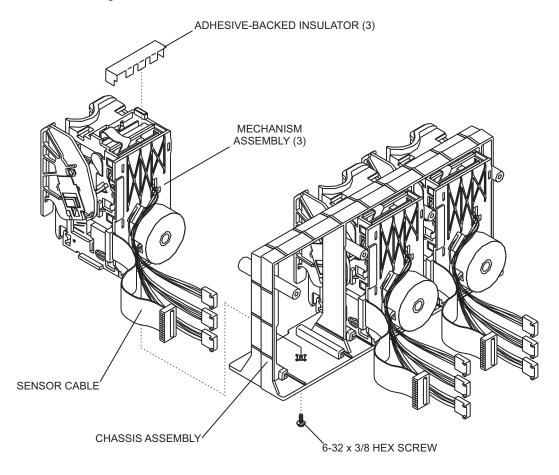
Chassis Assembly, Mechanism Assembly, and Sensor Cable
